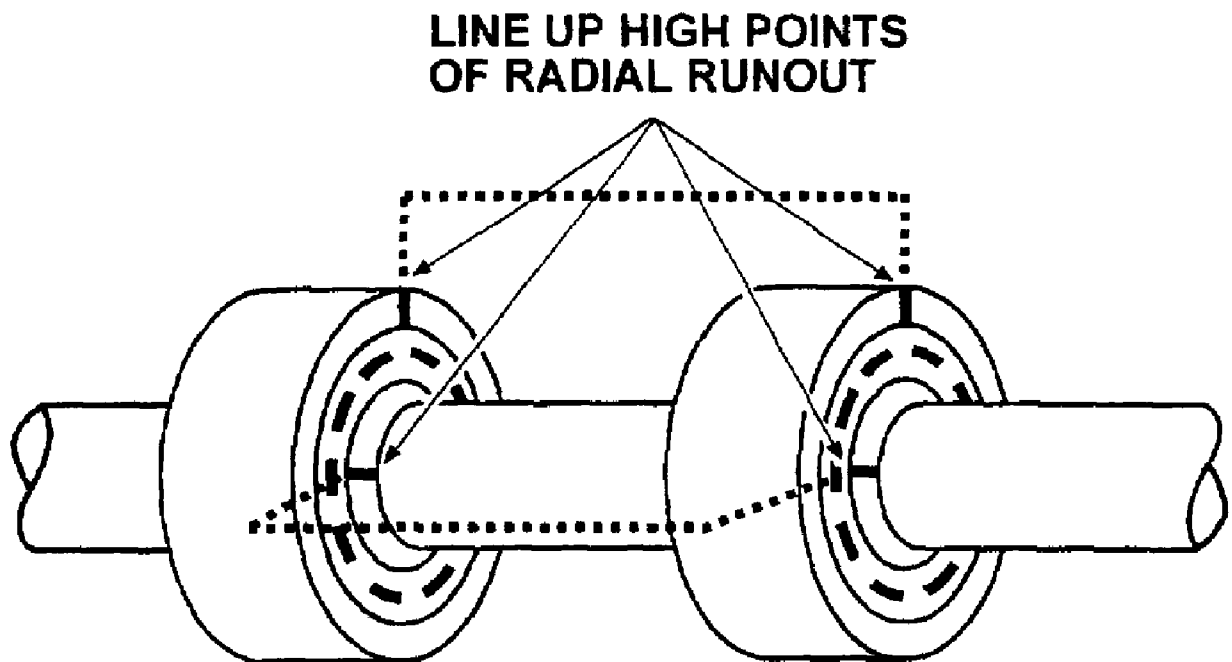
Bearing Ring Radial Runout Alignment of Precision Bearing Pairs
